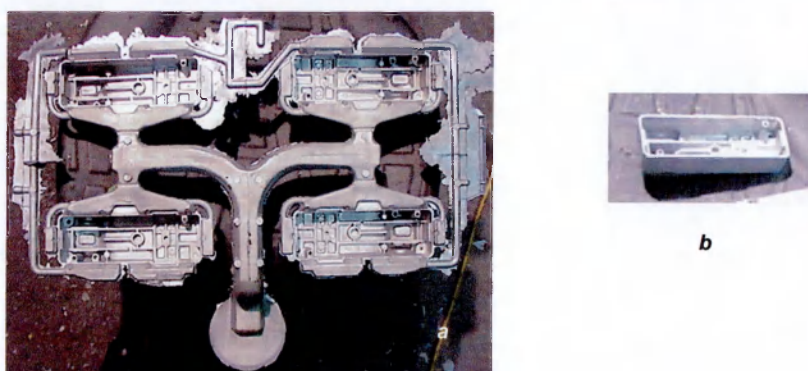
Casting from 4-impression die on Foundry C's 400 t machines
